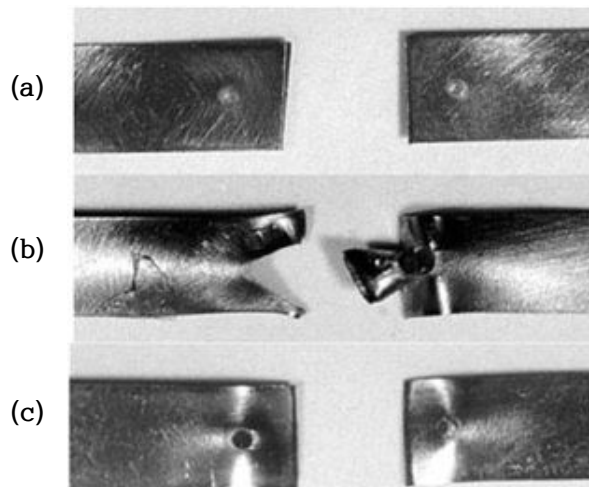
Failure modes of spot welds during tensile-shear test
